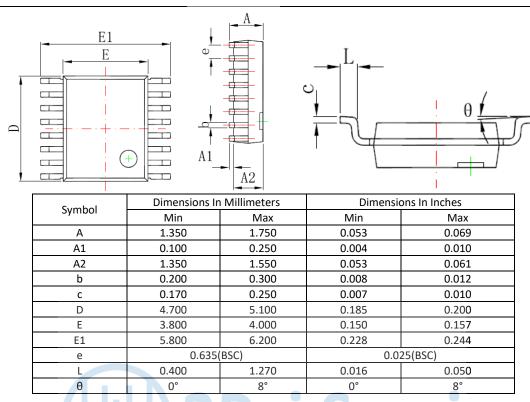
Lead SSOP Outline Package [SSOP16]
